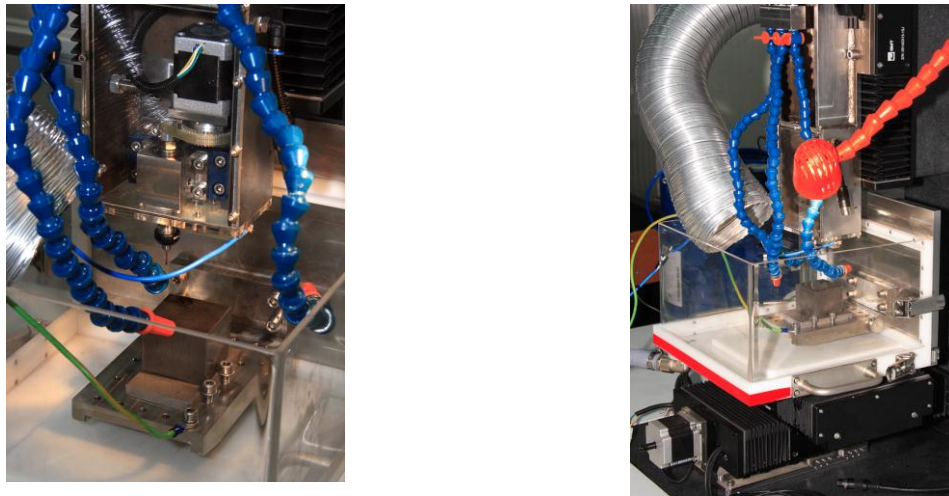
Photographs of the EC/EDMM hybrid sequential machine-tool developed in Cracow University of Technology.
